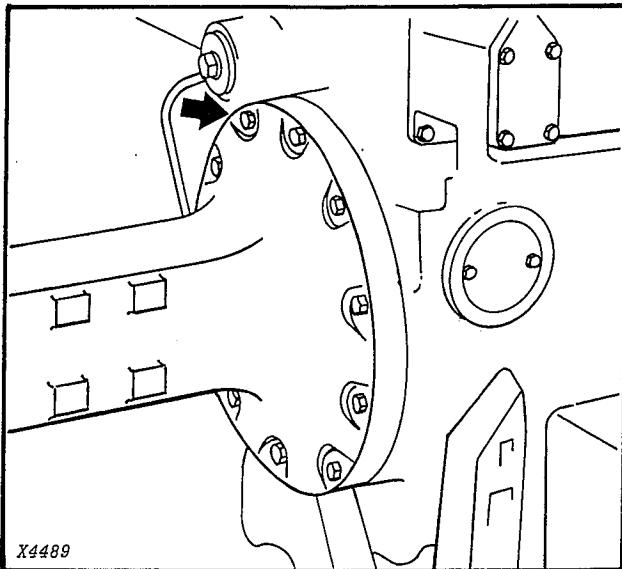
Tractor Rear Axle Housing Fastened to Differential Housing with Cap Screws
